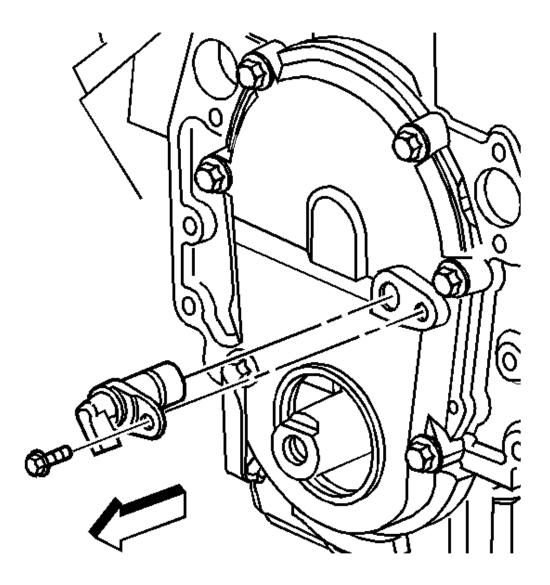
View Of CMP Sensor Courtesy of GENERAL MOTORS CORP.
